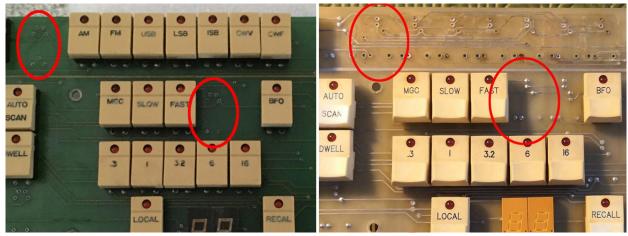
Comparison between the front PCB tracks on the front panel assembly of the WJ-5JK receiver (left picture) and of the stock WJ-8718A/MFP (right picture).
